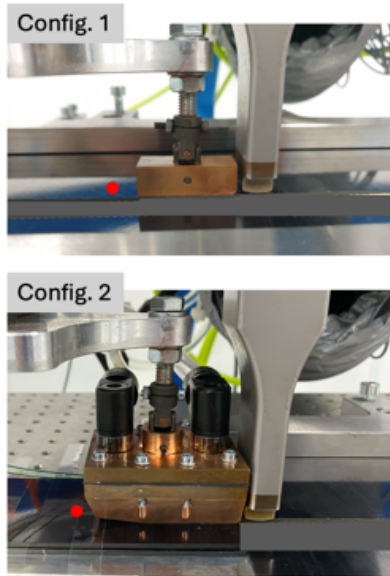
Different configurations of the ultrasonic welding set-up
